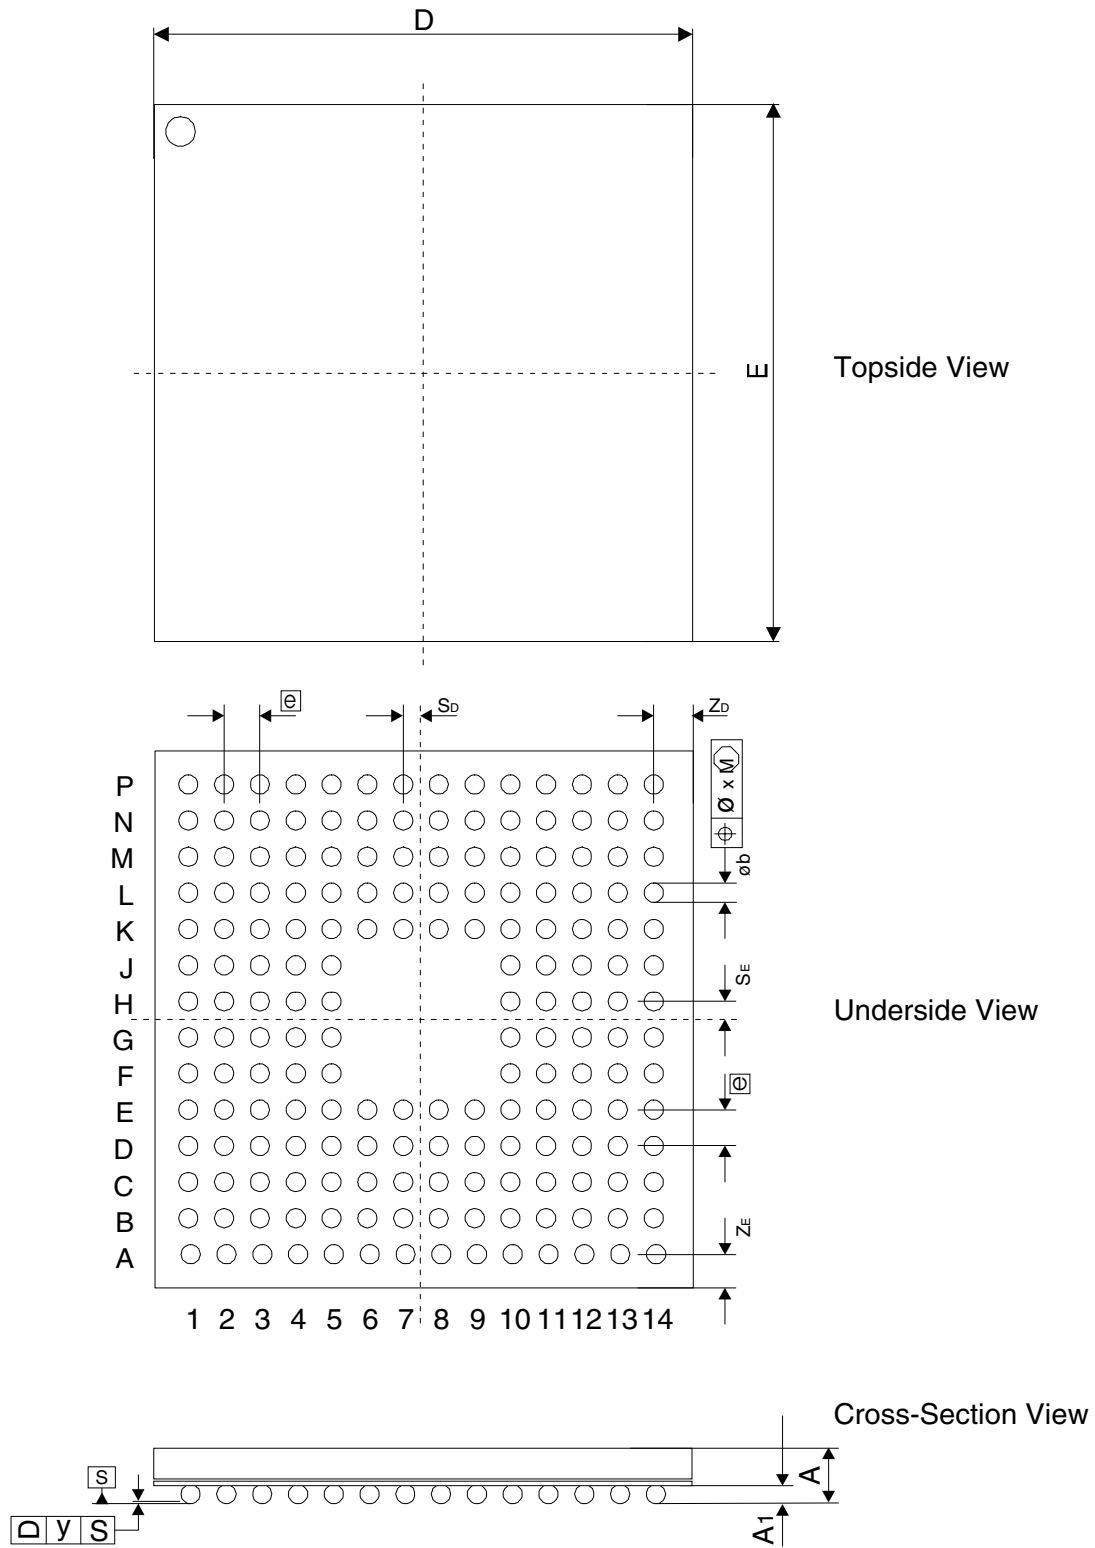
180-Pin μ BGA Package Mechanical Dimensions—Topside, Underside, and Cross-Section Views
